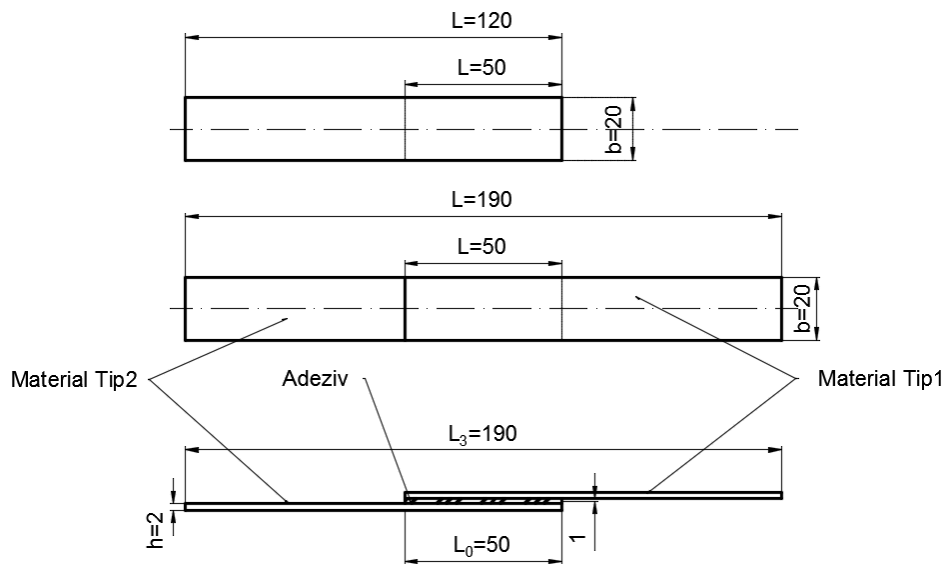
Test specimen made to determine the shear properties in the bonding (soldering) plane by tensile testing
